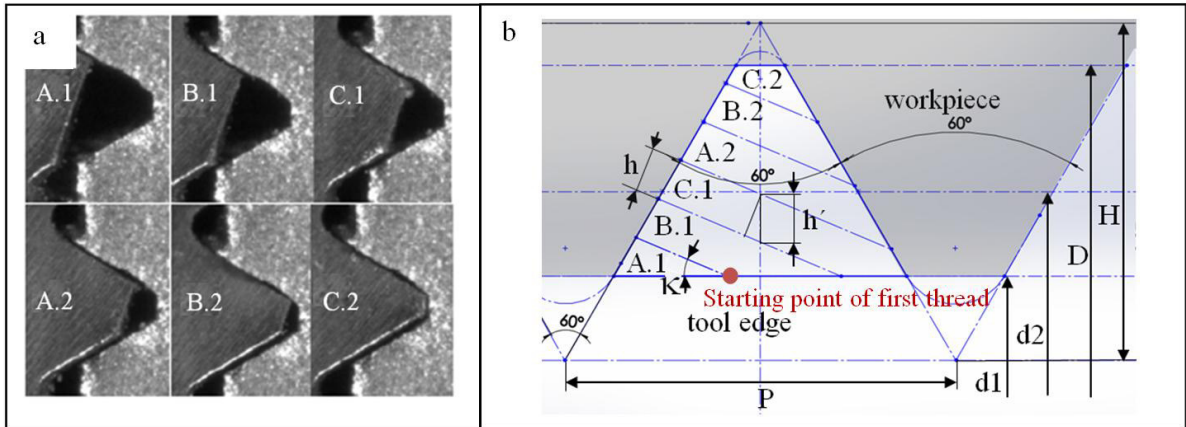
(a) Cross section of the cutting area for each chamfer thread edge during tapping[7]; (b) 2D Modell of the chamfer thread edge with theoretical uncut chip geometry.
